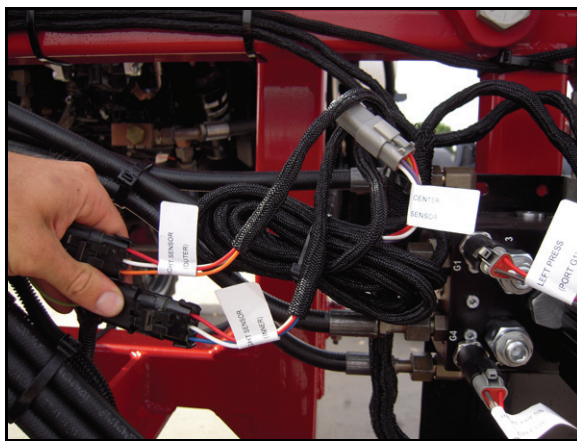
Machine's CAN Terminator Connected to AutoBoom Harness Cable
